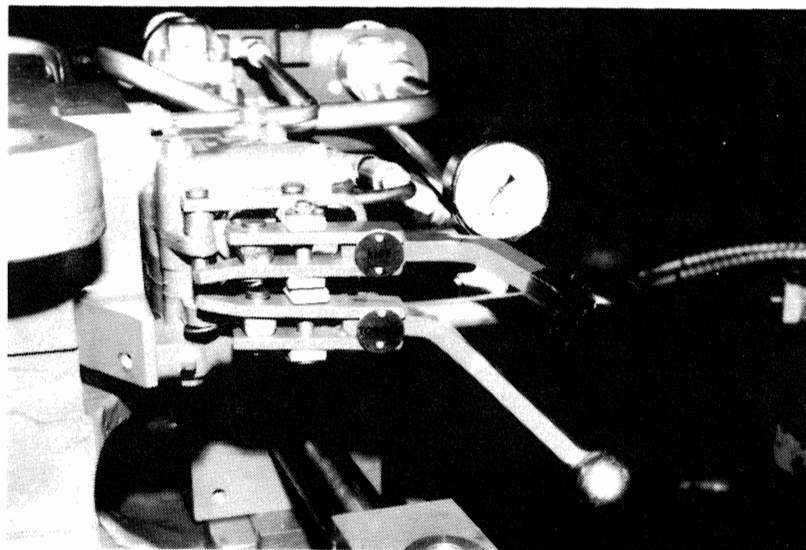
RH Direction Control Torque and Lift Valve Assembly
